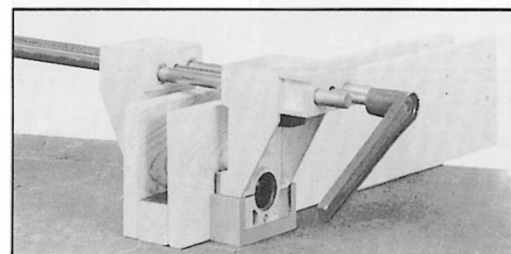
Vice with parallel clamping (large bearing surfaces), without jaws e, f and g.
